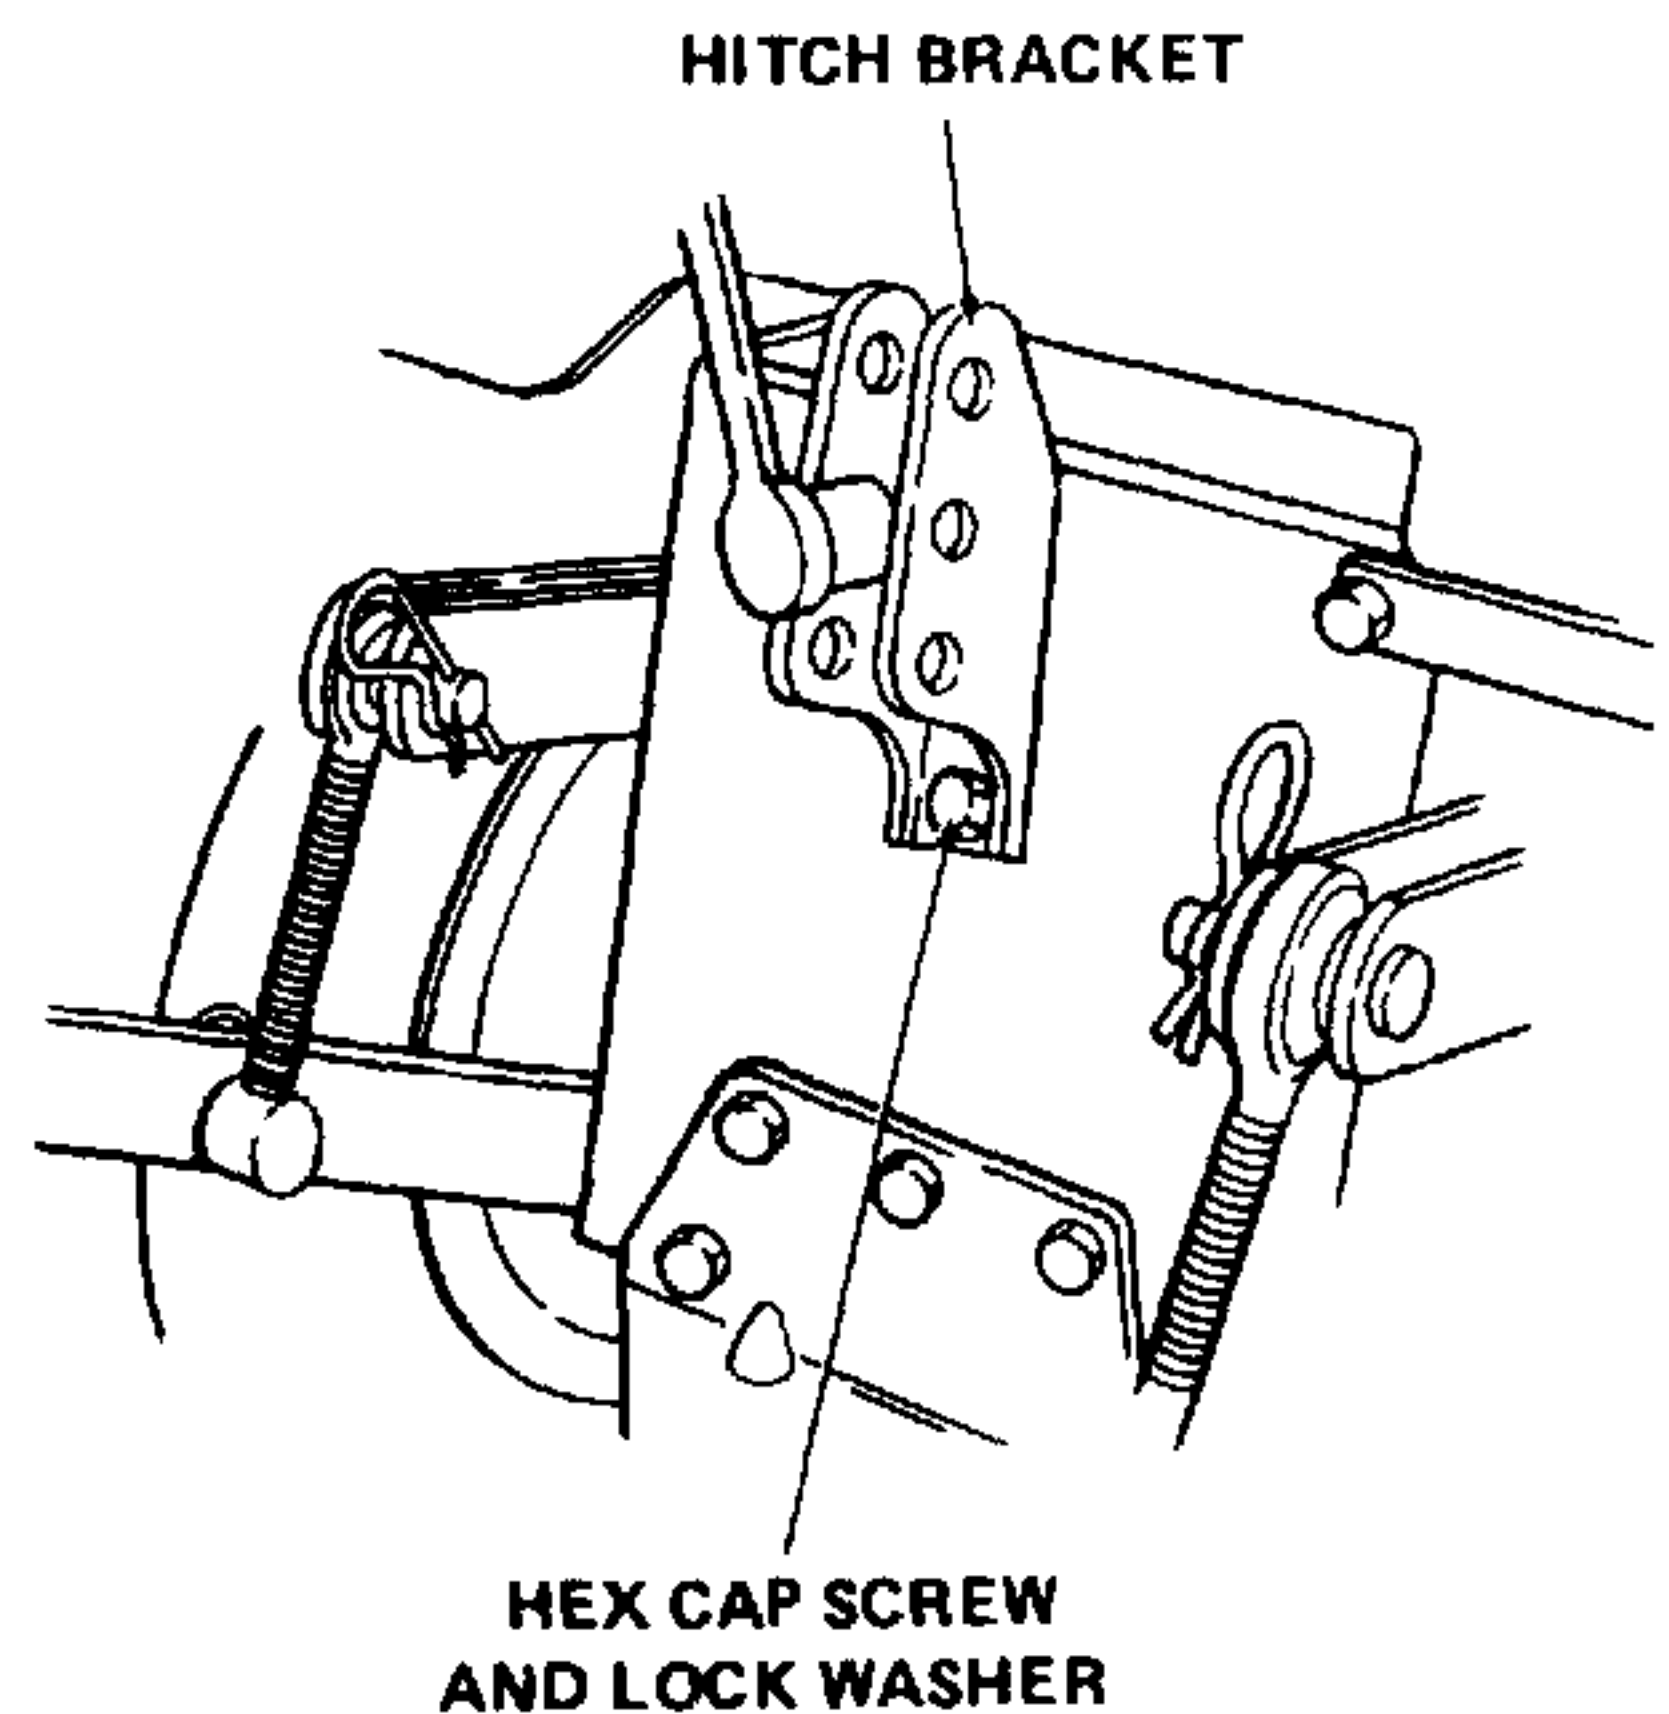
Installing Hitch Bracket on 3-Point Hitch Plate Assembly.
